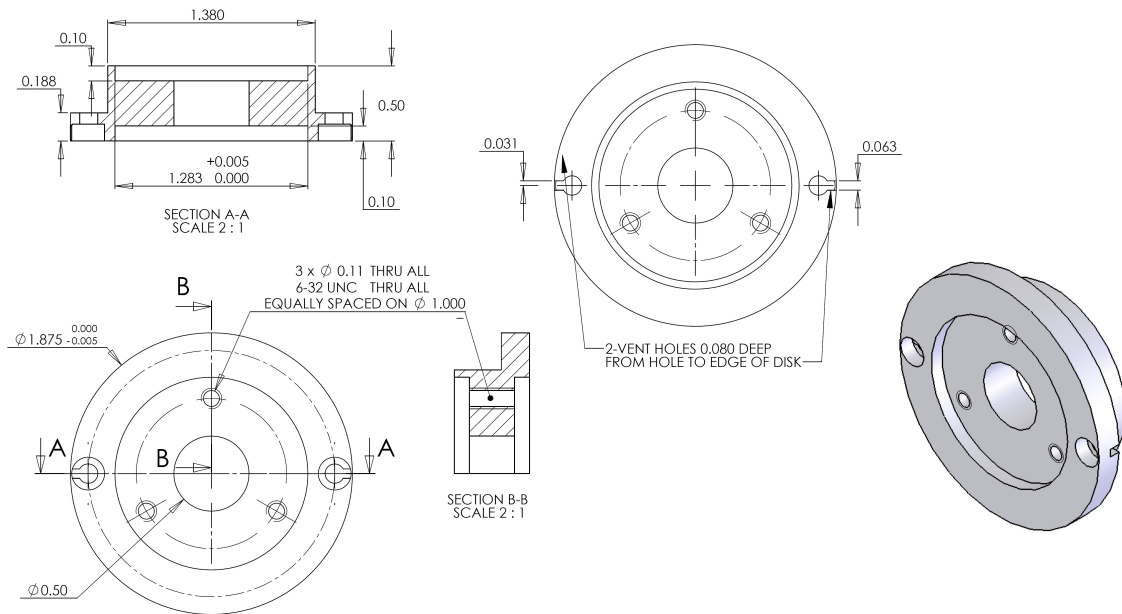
Technical drawing of the RFA removable front plate. All measurements are in inches
